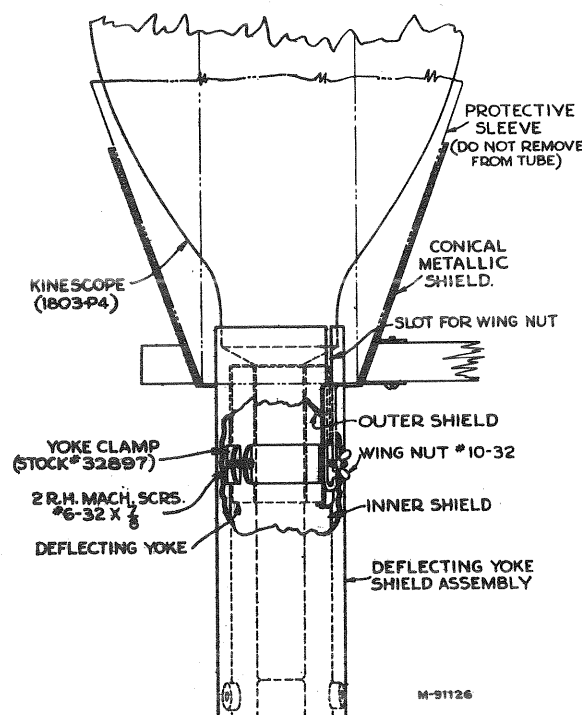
Assembly Details, Showing Kinescope and Deflecting Yoke Shielding
